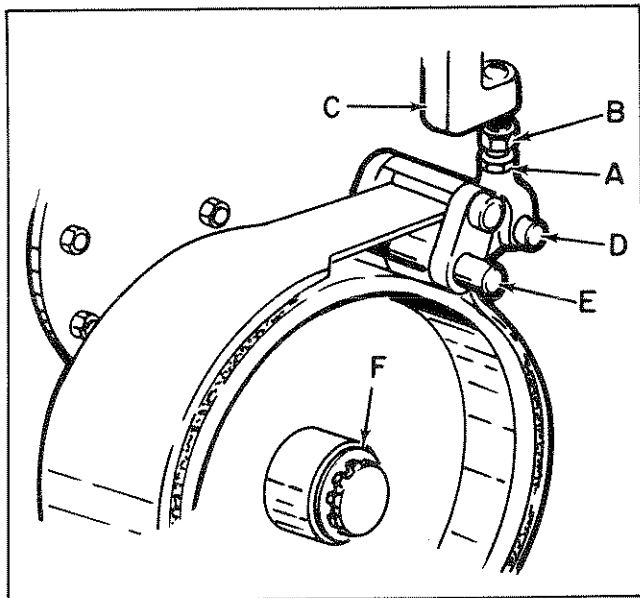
Direct Drive Brake Band And Adjusting Linkage.
